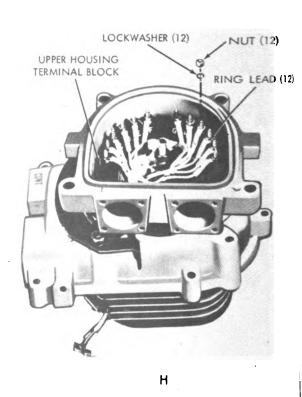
Slipring box disassembly or assembly (2 of 7).
